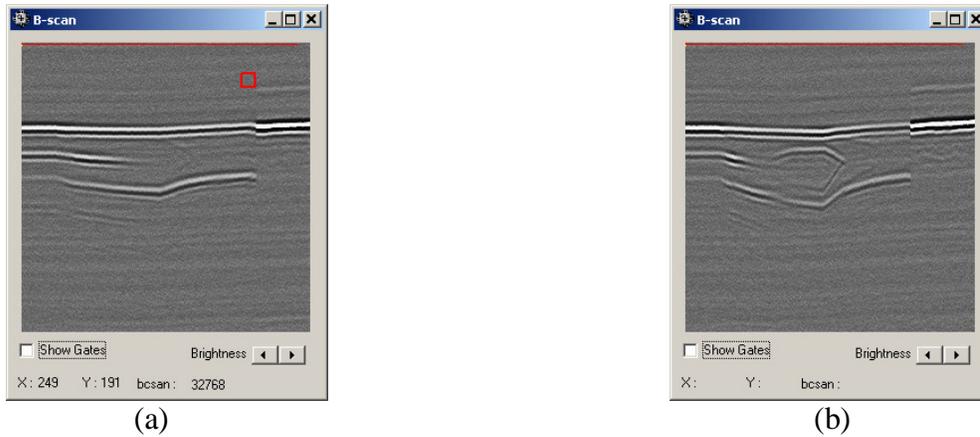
(a) – B-scan representing a stick weld; (b). the typical B-scan representing a good weld.
